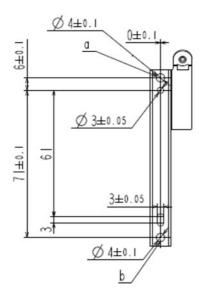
Equipment Mounting Bracket: Installation Point Dimensions
